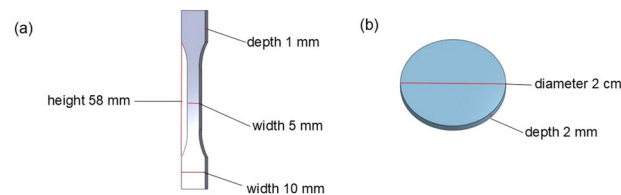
Schematic of (a) dogbone dimensions and (b) coupons used in this study.
